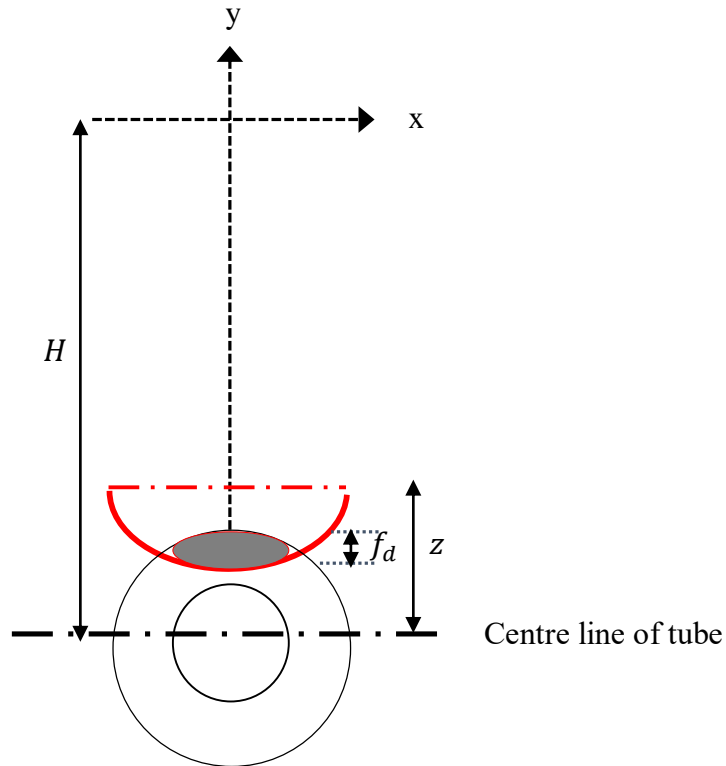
Schematic showing the modelling of a u-shaped flawed tube - cross-section.
